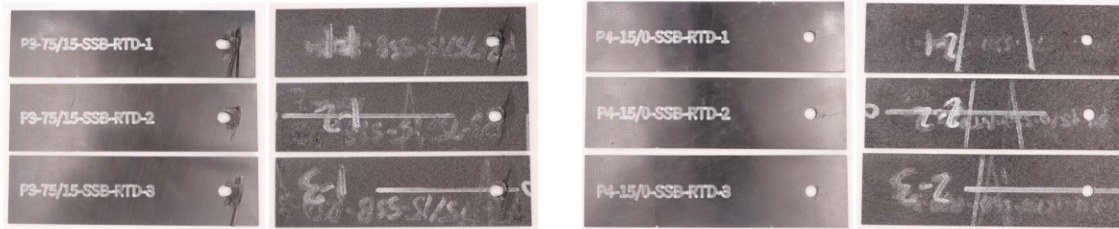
Single-shear, single-fastener bearing tension (SSBT) test samples
